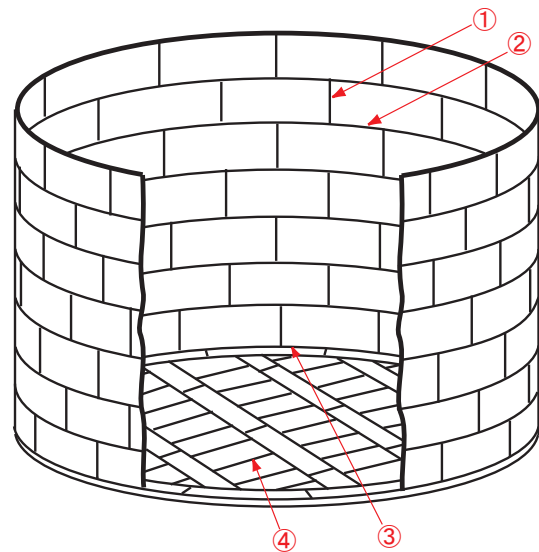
Cross sectional view of typical welding joints in the shell and bottom of a 9% Ni steel tank in on-site fabrication. (Refer to Table 11 for individual welding procedures)
